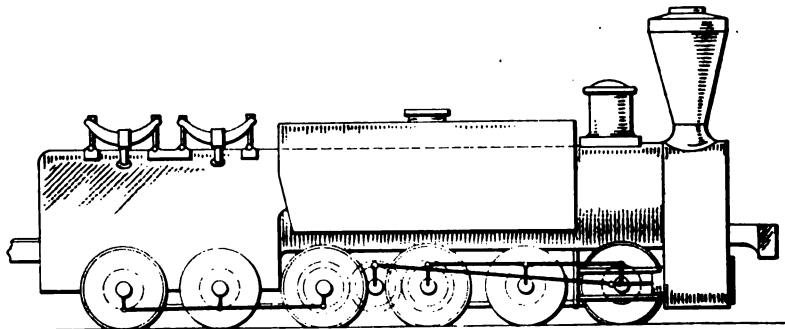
SIX-AXLE GEAR TRANSMISSION LOCOMOTIVE BY TOURASSE
